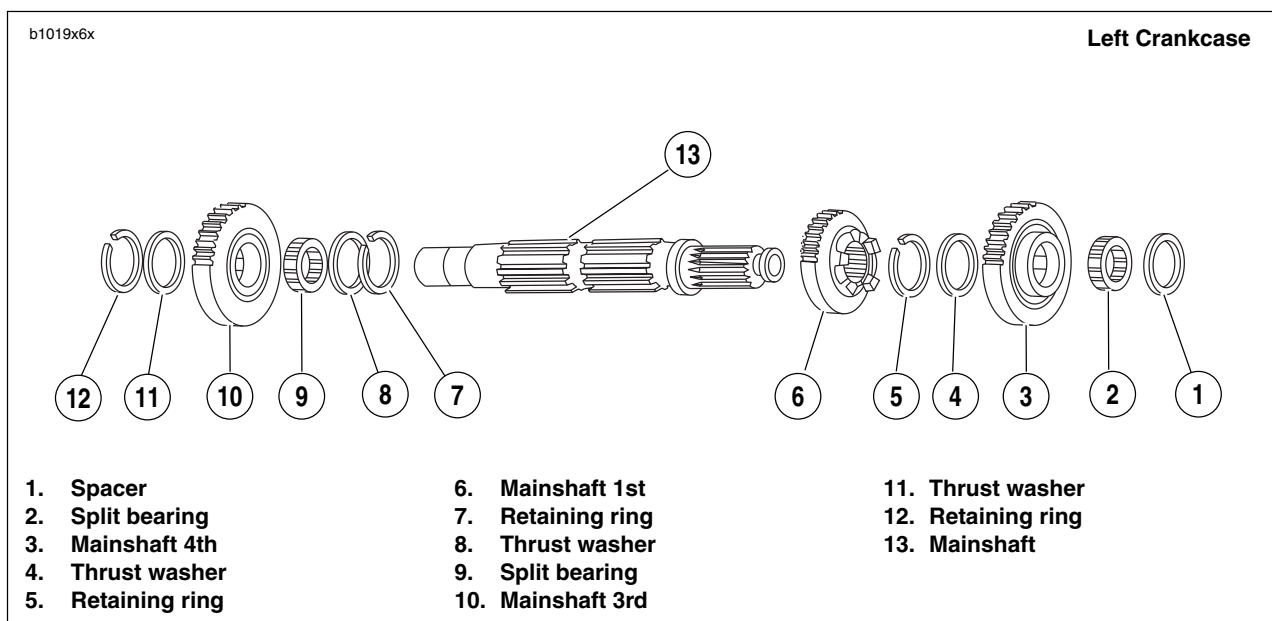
Transmission Mainshaft Assembly Once Removed from Left Crankcase/Disassembly
